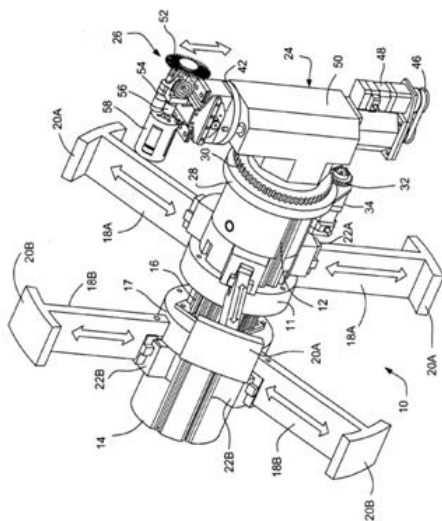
A perspective view of weld mitigation tool [7]
